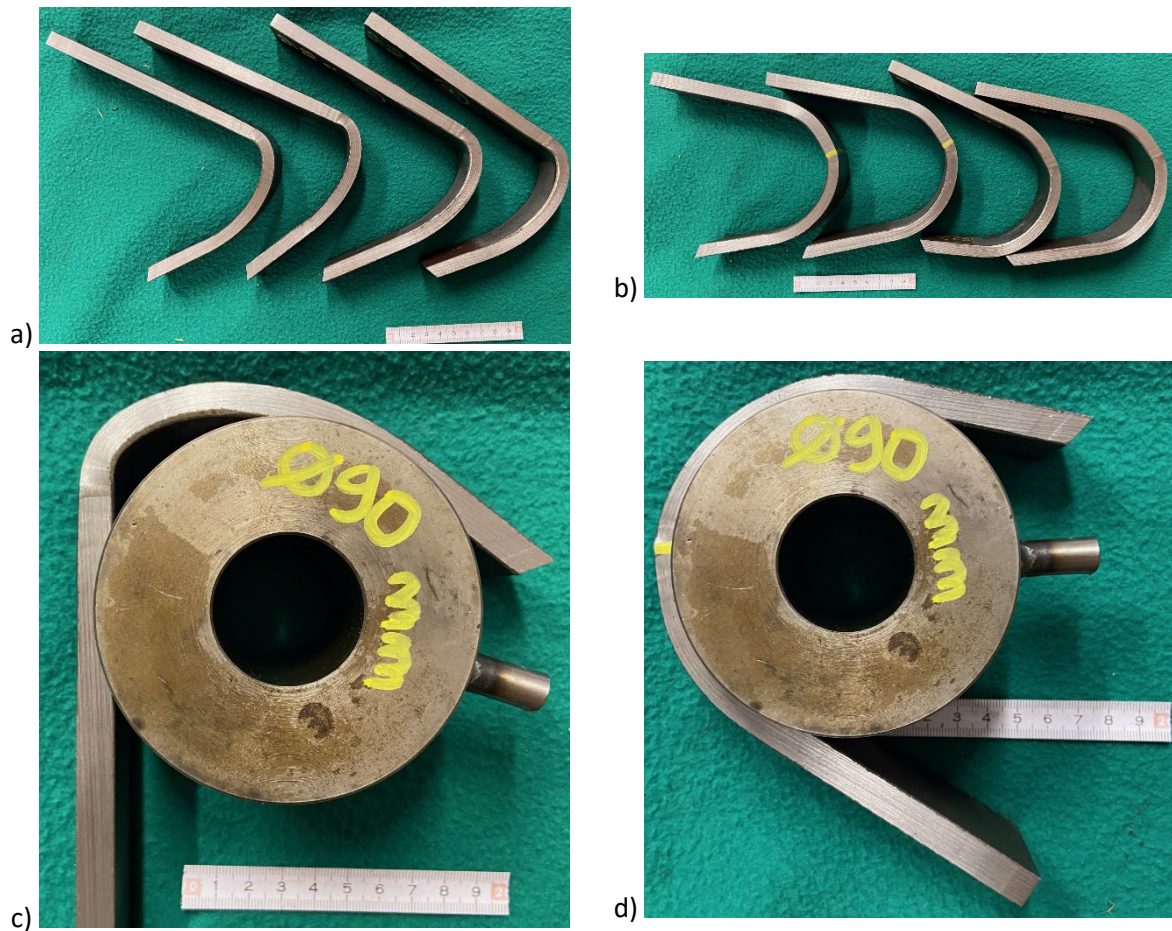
a) specimens after three-point bent test, b) specimens after bent test with roller, c) three point bent test specimen with mandrel, d) specimen bent with roller with mandrel.
